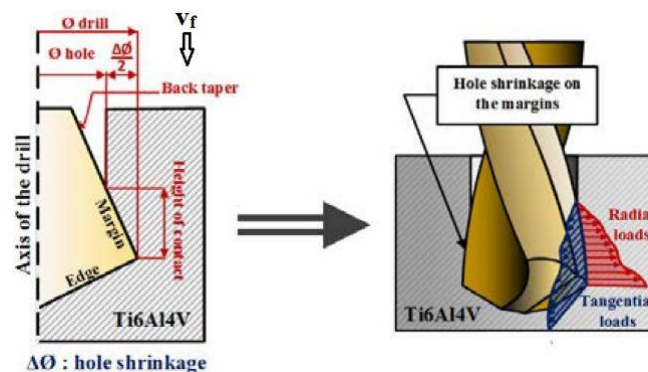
Hole shrinkage and induced mechanical loads on the tool margins [89].
